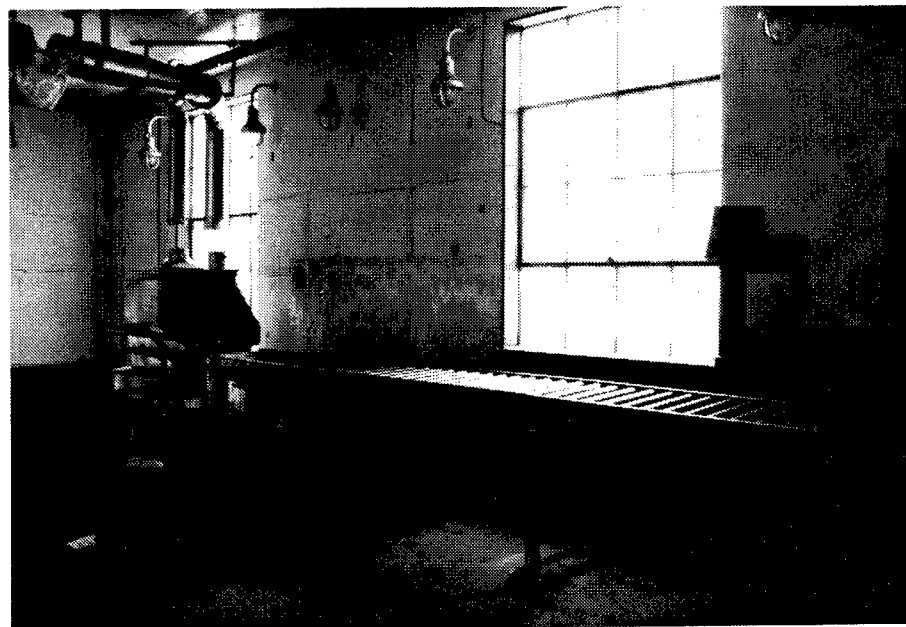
Building K9: TNT Conveyor Belt to TNT Melters.
